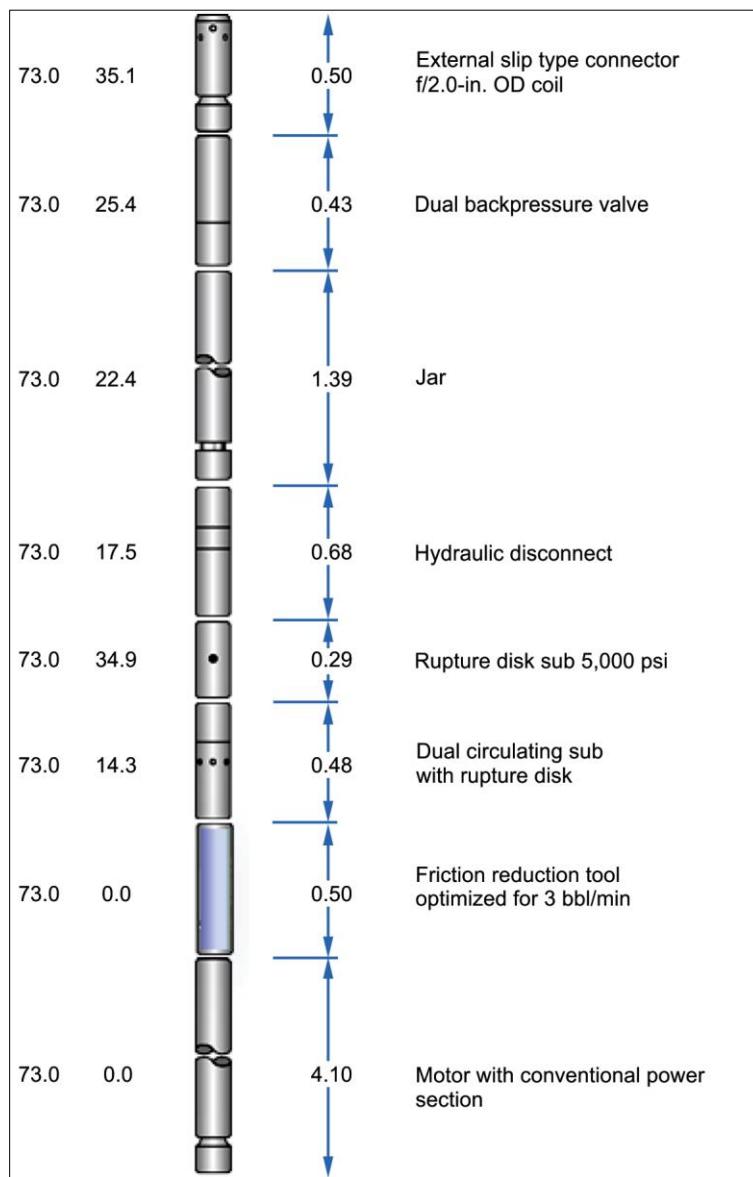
Typical BHA used for drilling out fracturing plugs.
